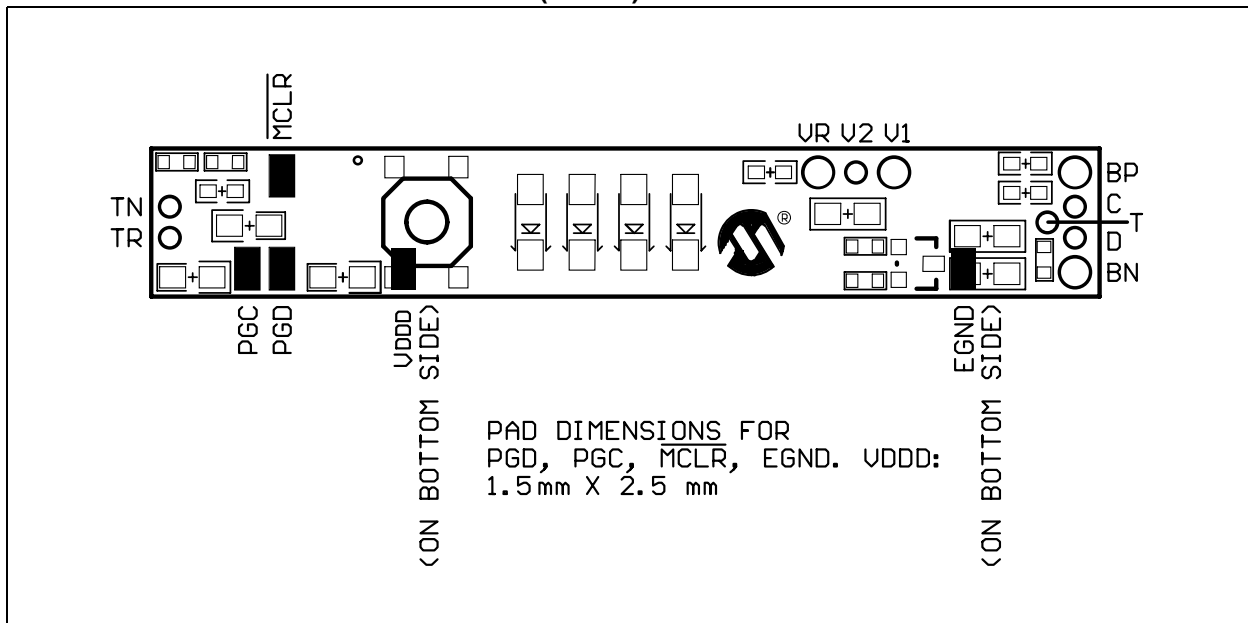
BOARD ASSEMBLY (SIDE 1)
